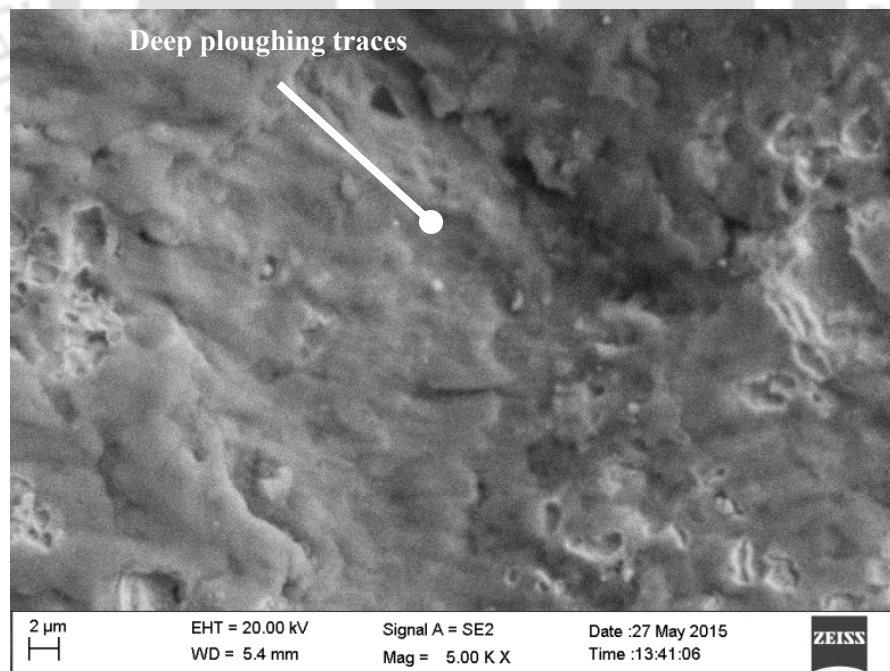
(b) Close up view of the rake surface of the cutting tool without CaF_2
